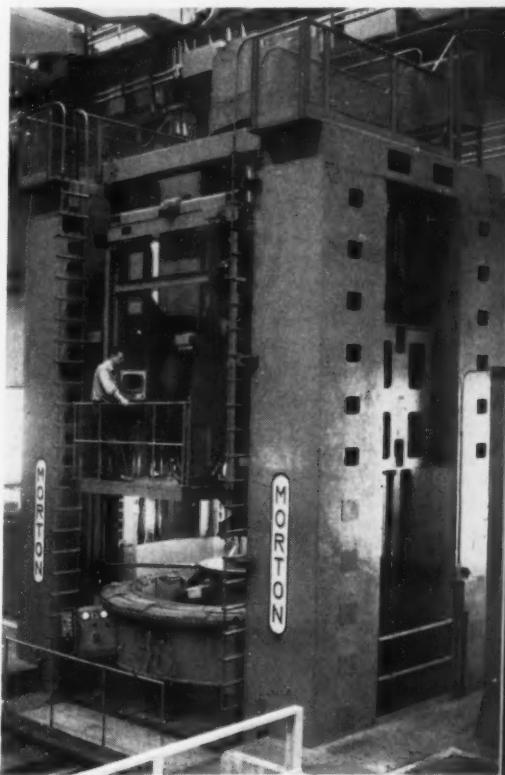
Closed-circuit television gives the operator a view of the machining operations performed by this huge vertical boring and surfacing machine on high-pressure inner shells designed for large steam turbines.
